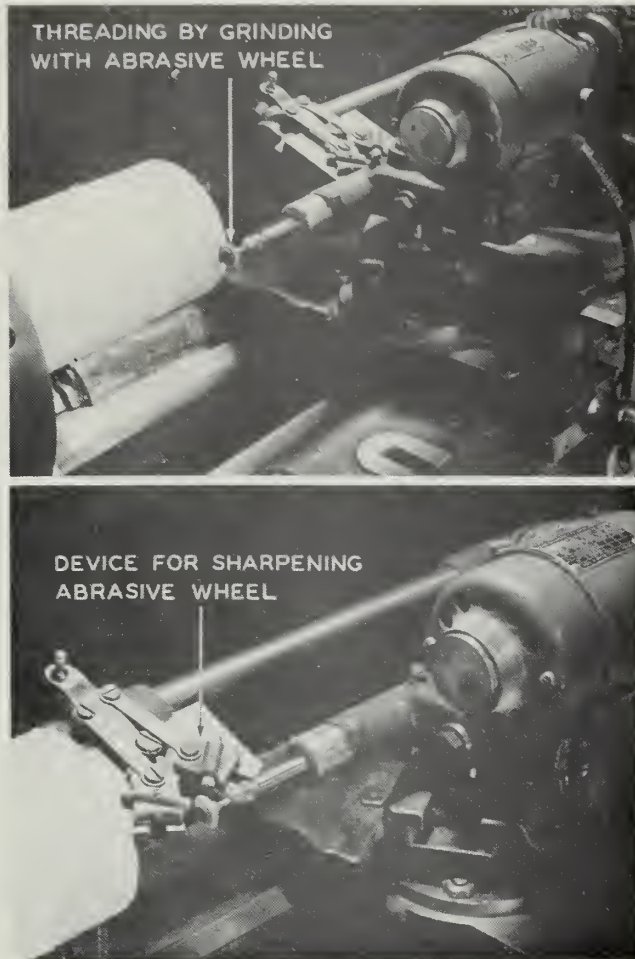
(Right) Upper figure: High-speed grinding equipment mounted on ordinary lathe, used for grinding exterior and interior threads on asbestos cement or plastic pipe and couplings. Lower figure: Device for sharpening abrasive wheel
